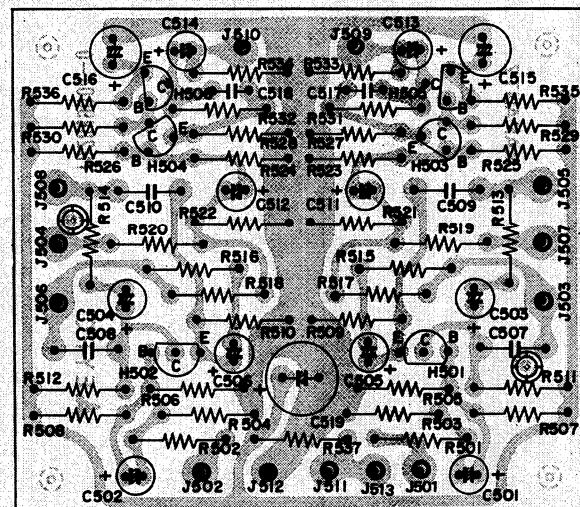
Vari-Matrix Unit Assembly P500 Component Locations
